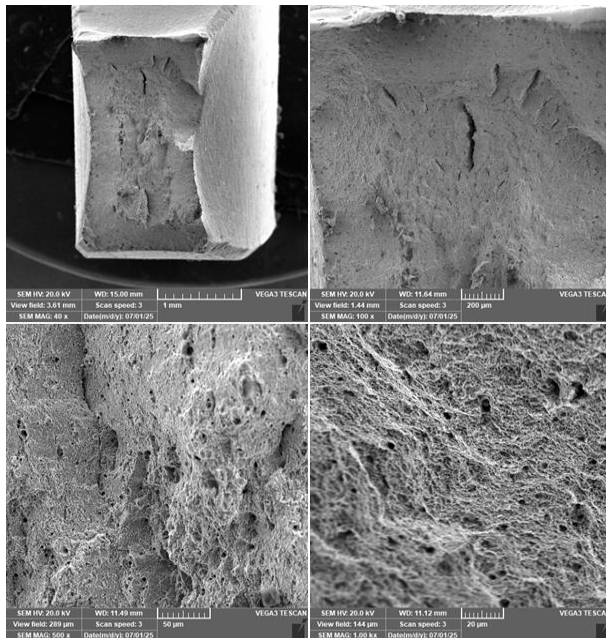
Fracture surface of the "L80 initial state" sample
